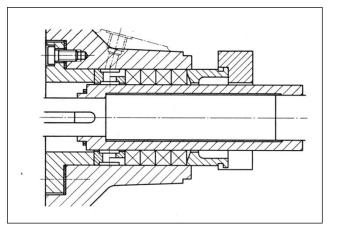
Arrangement c) Stuffing box with lantern ring at bottom end of stuffing box
